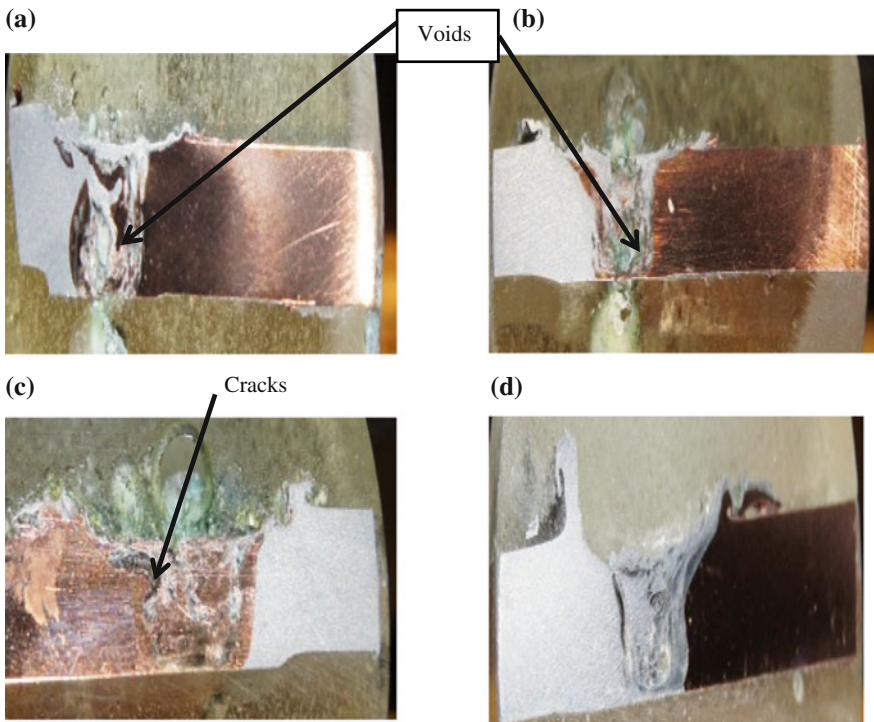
Cross sections of the friction stir welded Al6061-T6 to Cu joint at different welding conditions, a condition 2, b condition 3, c condition 4, d condition 5
